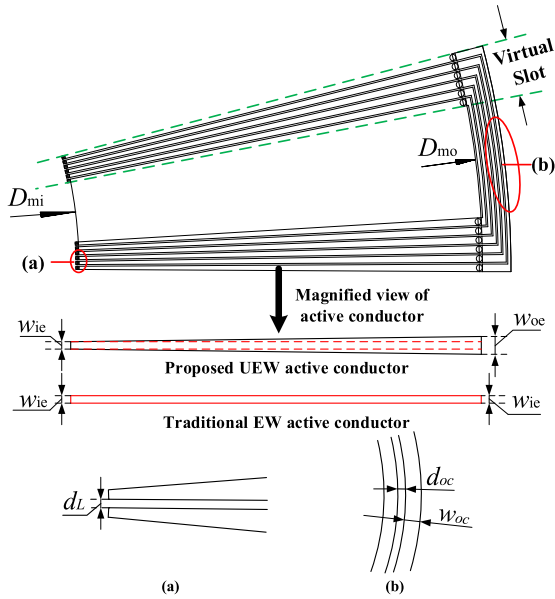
The main parametric design diagram of PCB winding. (a) Magnified view of active conductor at inner ending. (b) Magnified view of connection conductor at outer ending.
